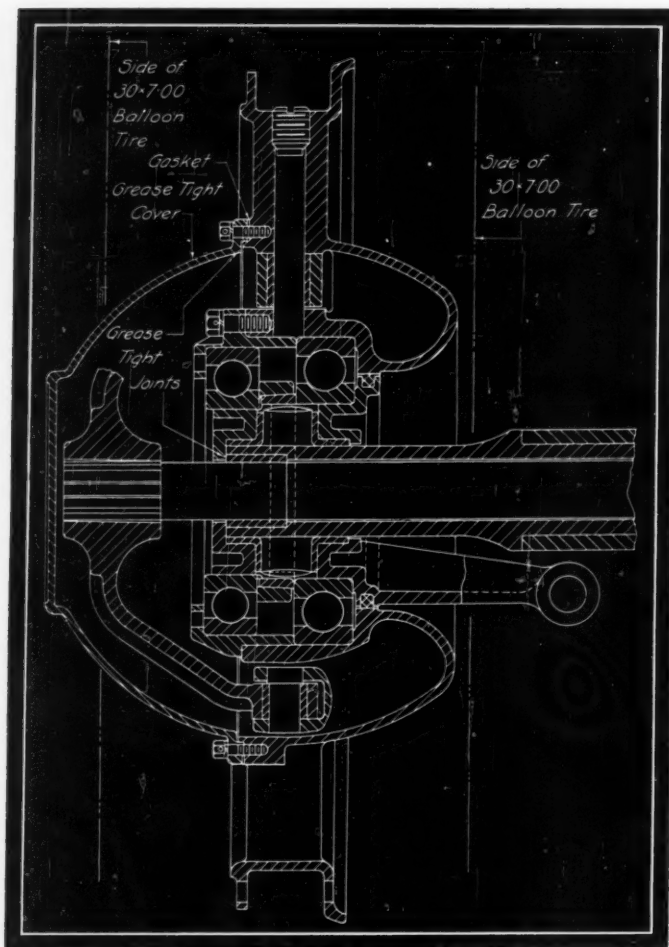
Colman design. Pin at top shown 90 degrees out of position to indicate its mounting
